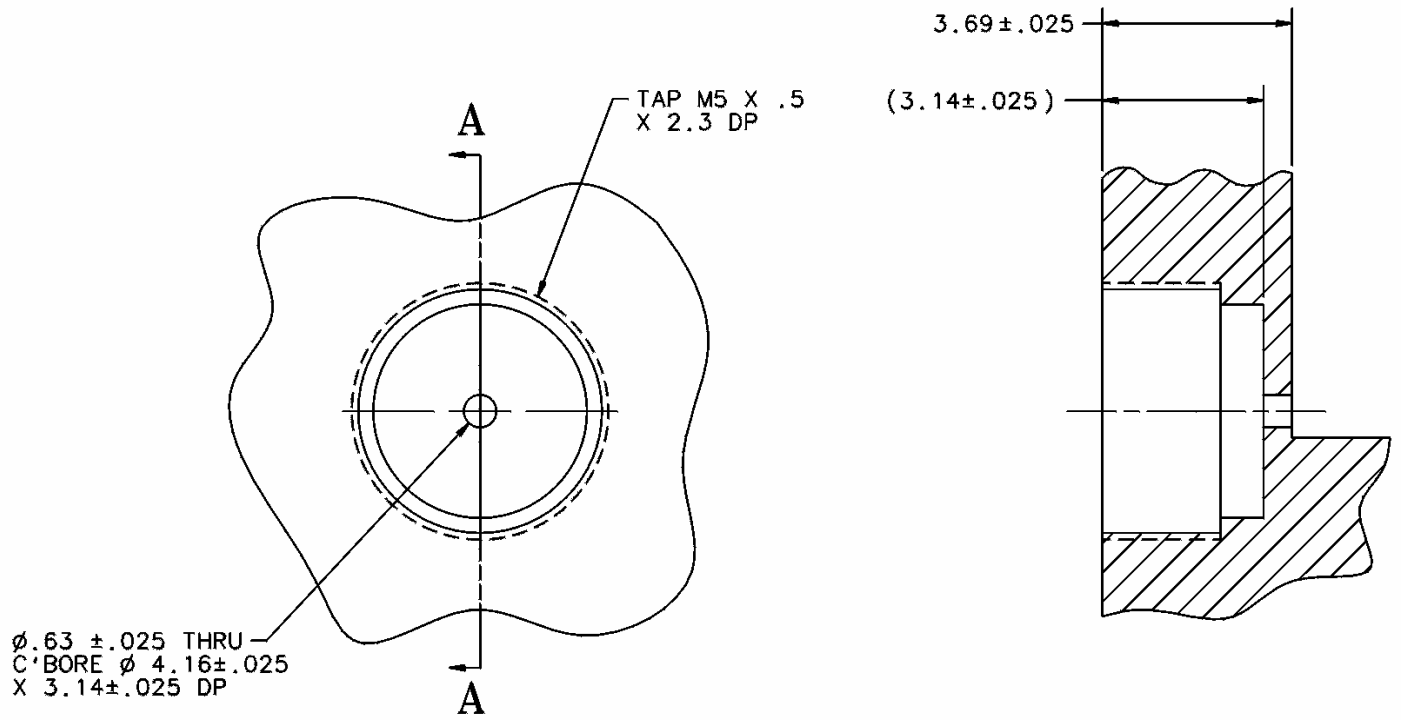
VP100B Mounting Hole Dimensions and Assembly Drawing
